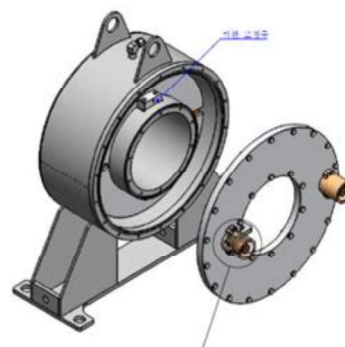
Detailed drawings of the electromagnet housing case and electrical feedthroughs
